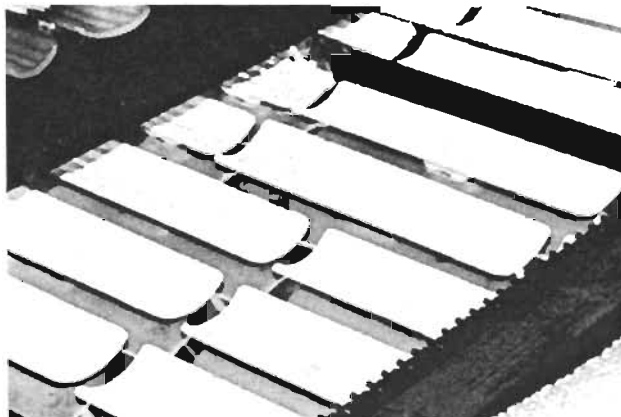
Typical ceramic plate pre-heaters used in soldering machines (DDL Electronics)
